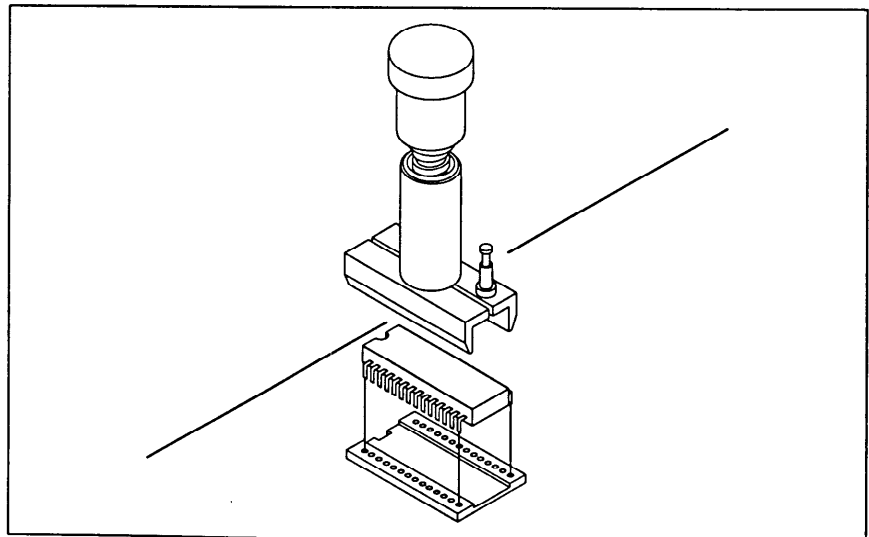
Aligning MEDIA NUMBER 3 with socket using insertion tool
